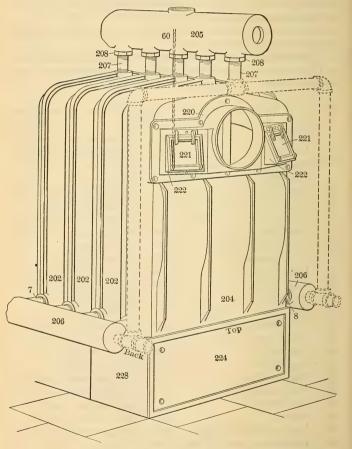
Parts of Sectional Steam and Hot Water Boiler (Rear View).
